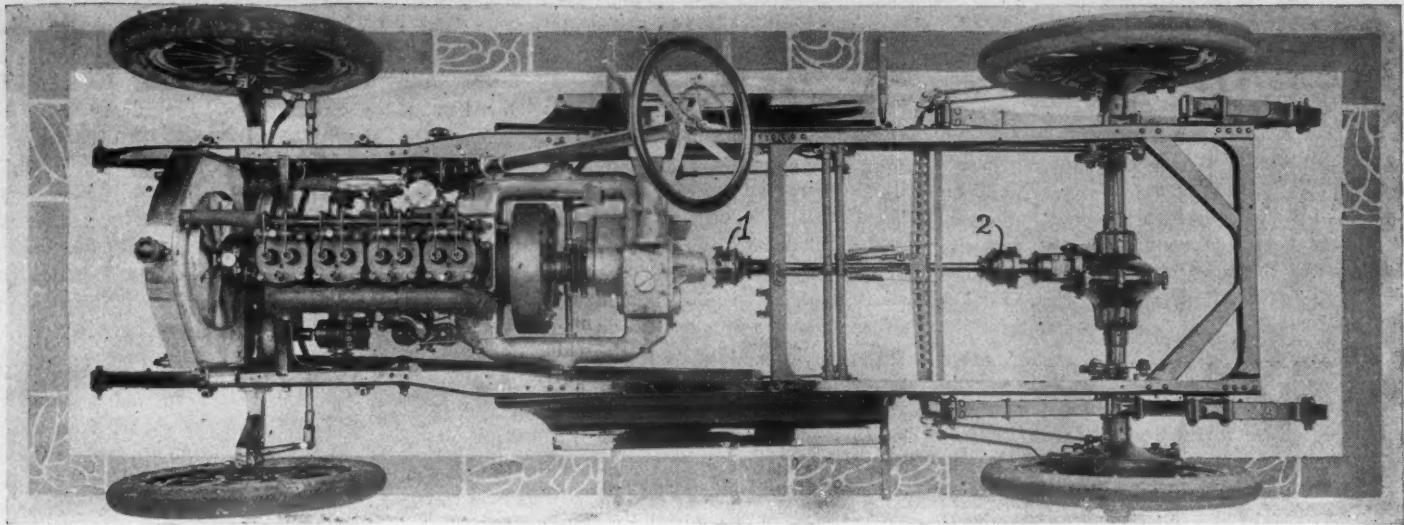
CHASSIS IN WHICH GEARBOX IS A UNIT WITH THE MOTOR—1 AND 2 UNIVERSAL JOINTS
